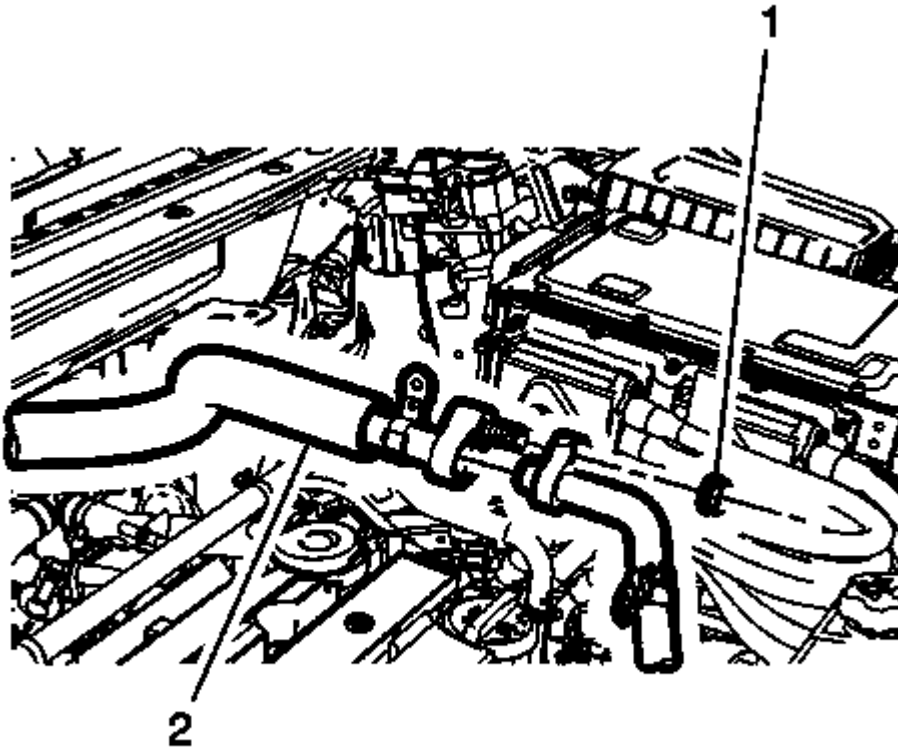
Air Conditioning Compressor And Evaporator Hose And Nut
